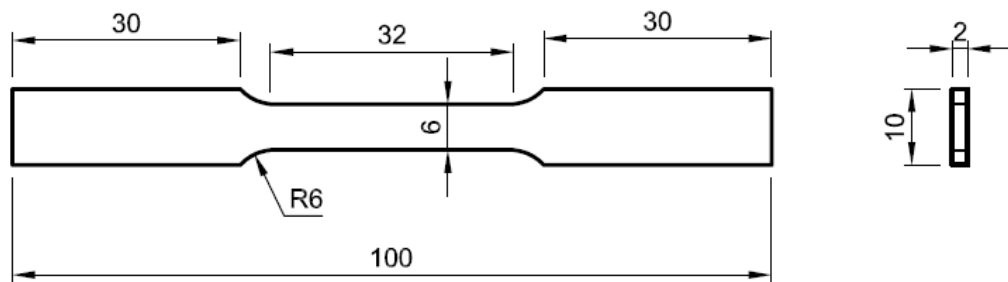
Tensile test sample standard dimensions (all dimensions in mm)
